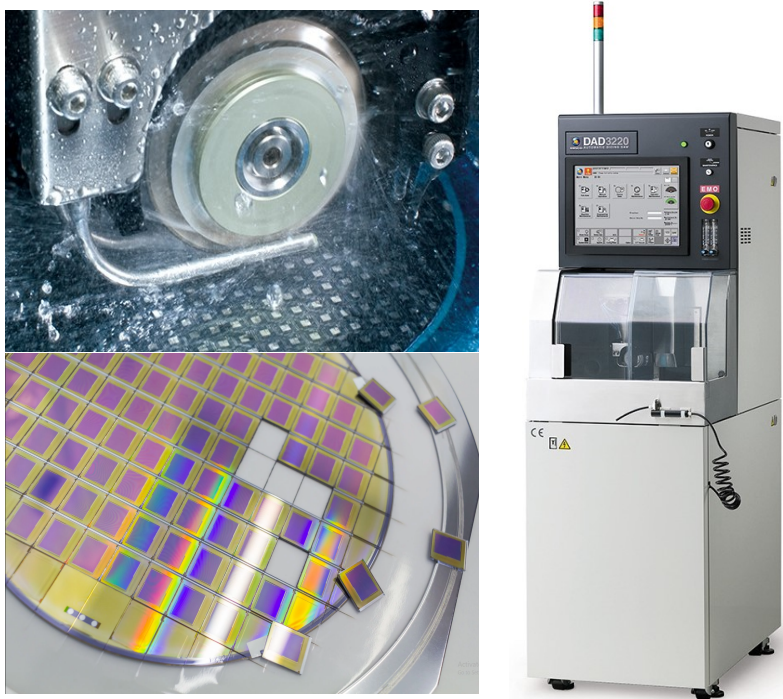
Informative photos on dicing. Top-left: Spindle with dicing blade during process. Bottom-left: example final result of dicing a fully processed wafer [120]. Right-panel: photo of used DAD3220 dicing machine [121].
